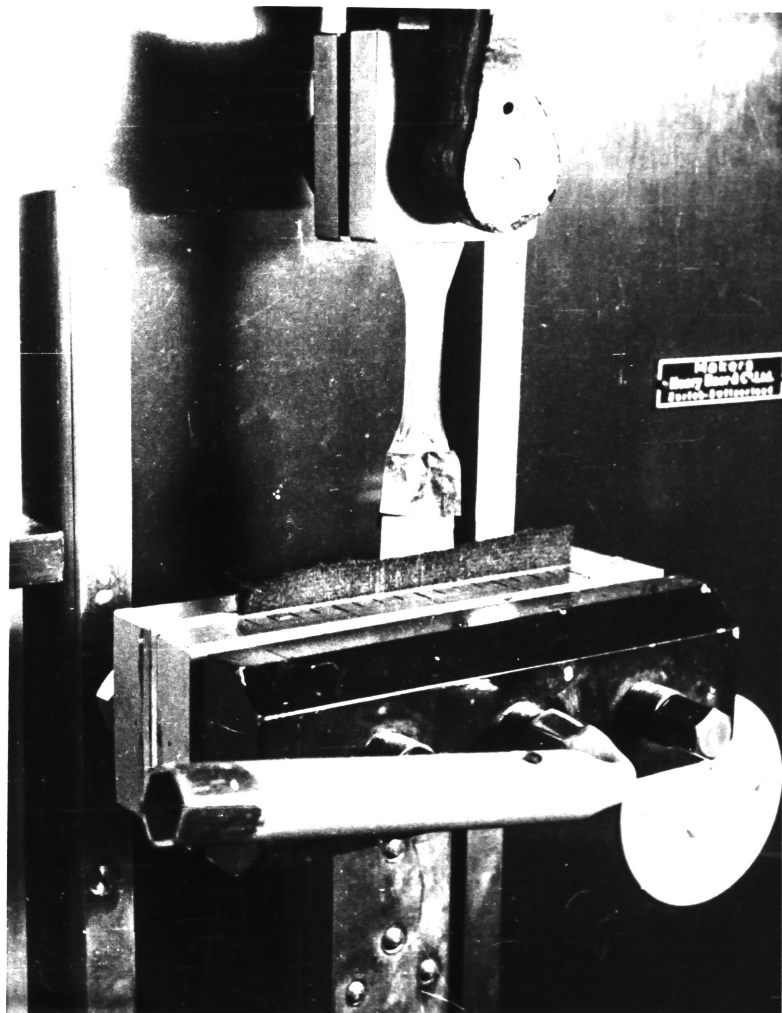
Plastalon weld under A.S.T.M. tension test.
